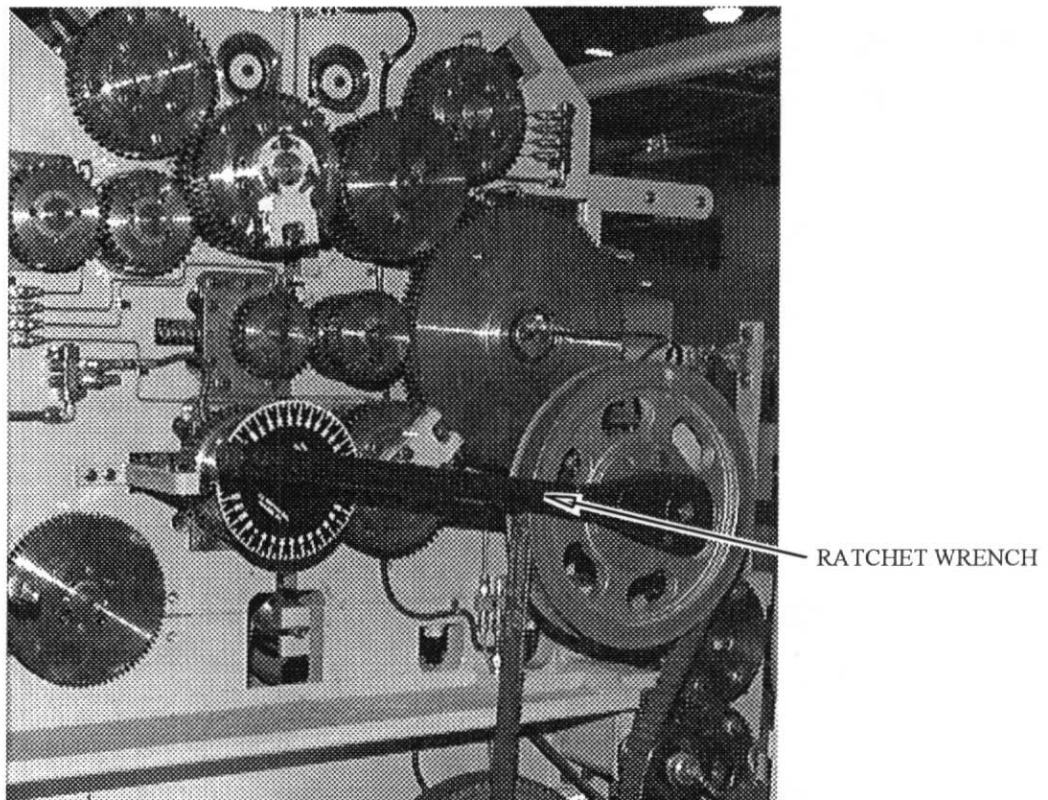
Ratchet Wrench On Drive Side Of The Machine
